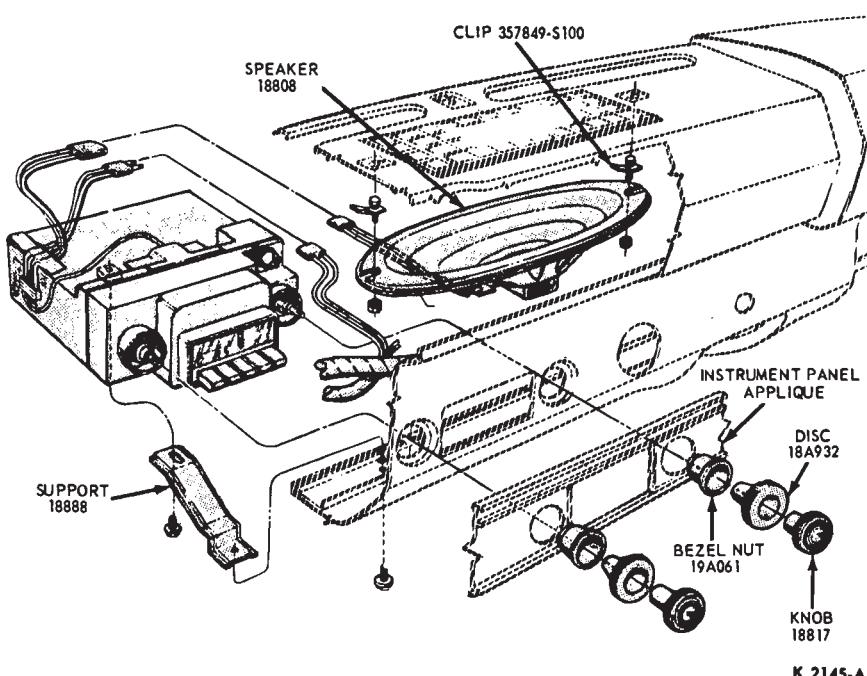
Radio Installation—Falcon, Fairlane, and Montego
